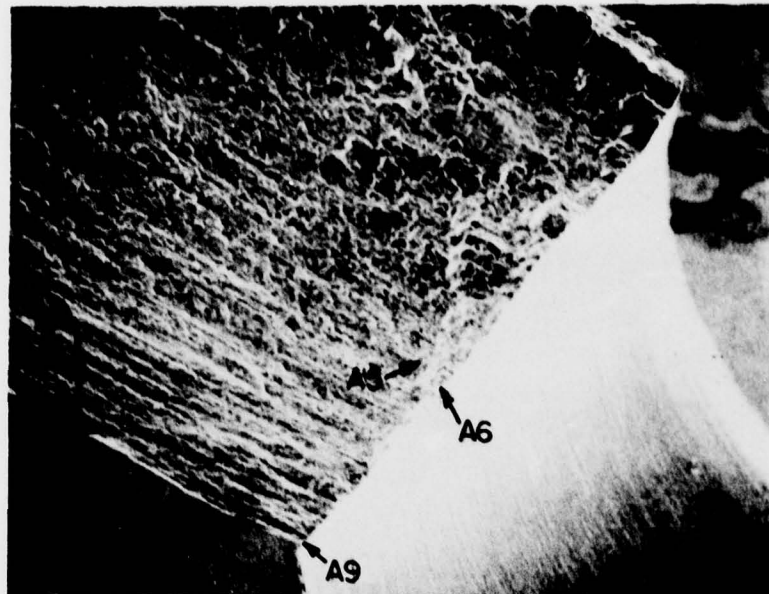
SPECIMEN NO. 33 VIEWED AT 17 DIAMETERS WITH THE SEM, LEFT SIDE OF HOLE
